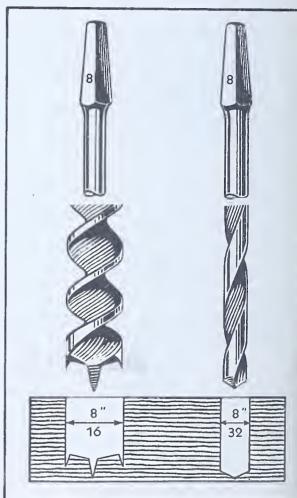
No. 8 Auger Bit and No. 8 Twist Drill
